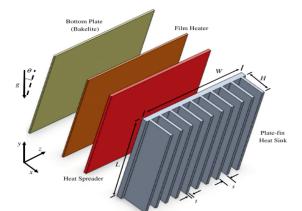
Schematics of tested plate-fin heat sink assembly [23].
